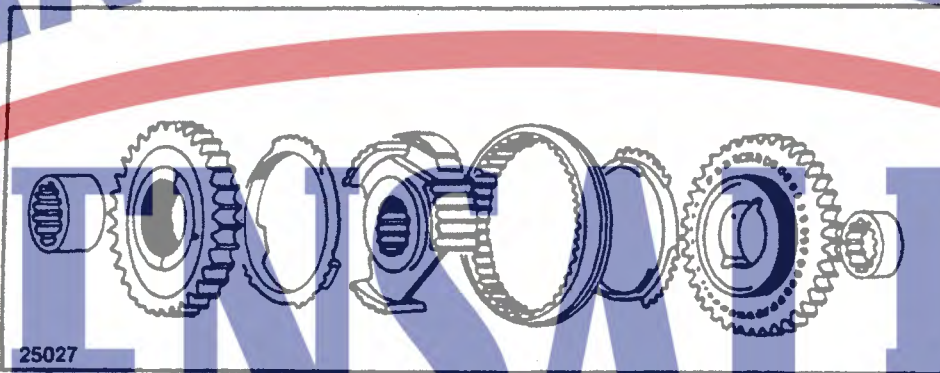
EXPLODED VIEW OF SYNCHROMESH UNIT
